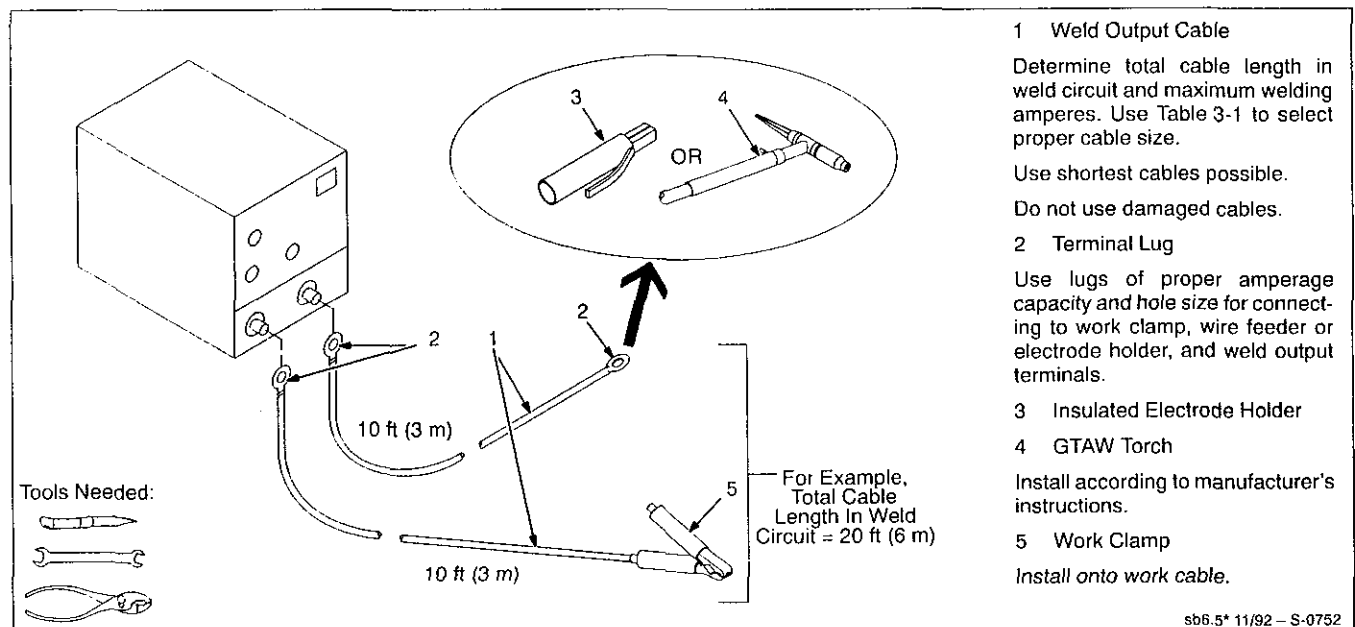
Selecting And Preparing Weld Output Cables
